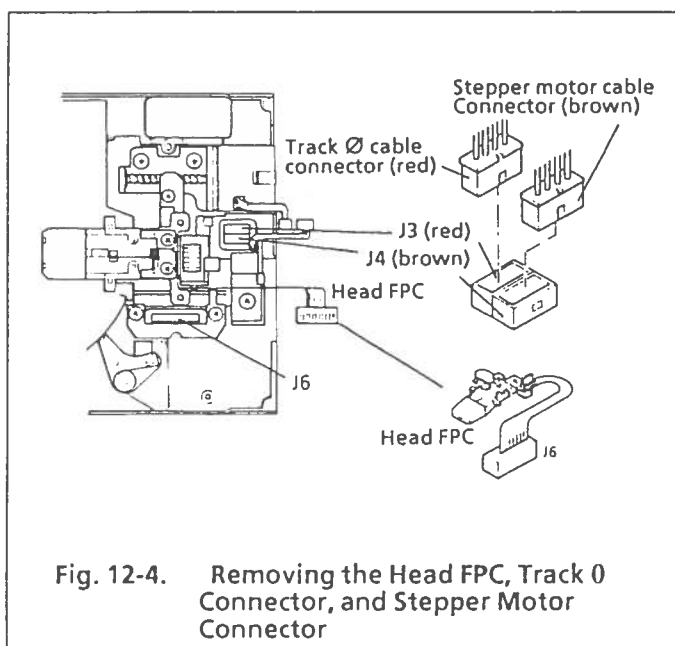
Removing the Head FPC, Track 0 Connector, and Stepper Motor Connector
